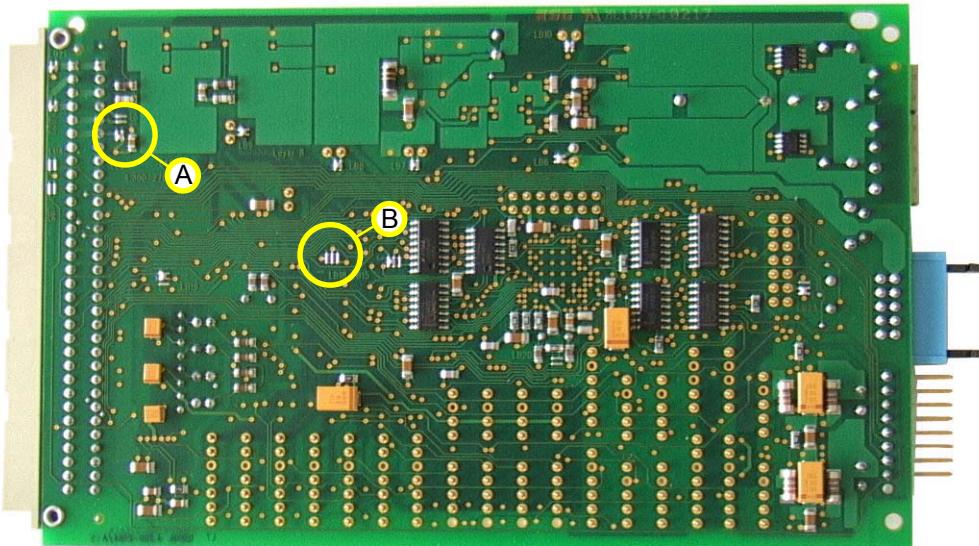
Soldering pads on soldering side of PCB "DSP01"
